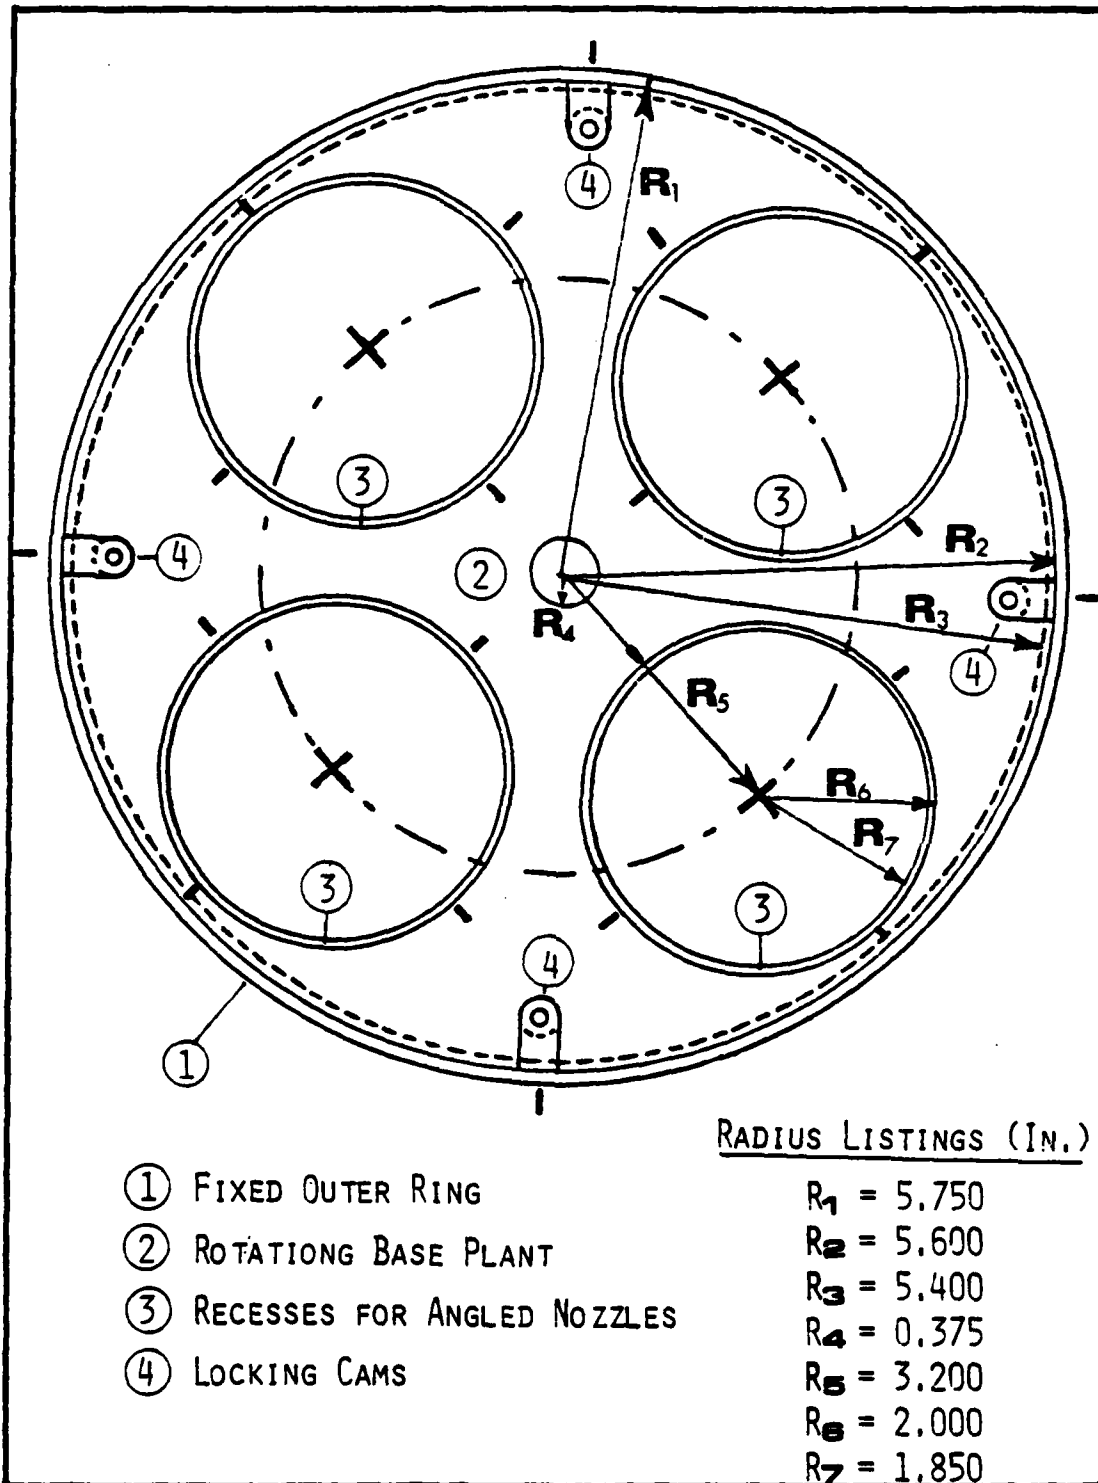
DIMENSIONS FOR THE ROTATABLE NOZZLE BASE PLATE
